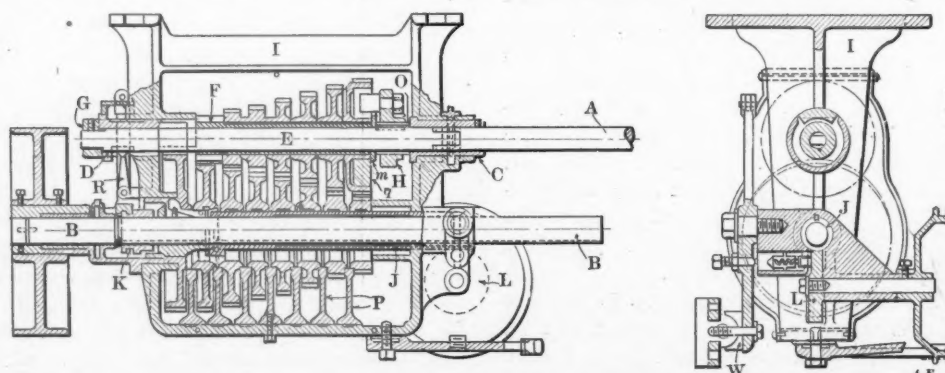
LONGITUDINAL SECTION AND CROSS SECTION THROUGH SHIPPER MECHANISM.
